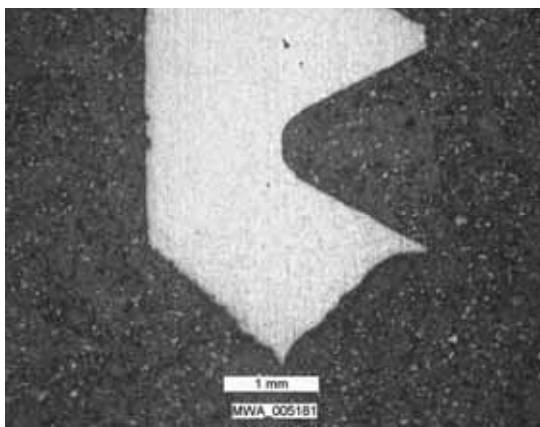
Metallographic sample of the screw coupling: overview of the end of the thread and the fracture surface.
